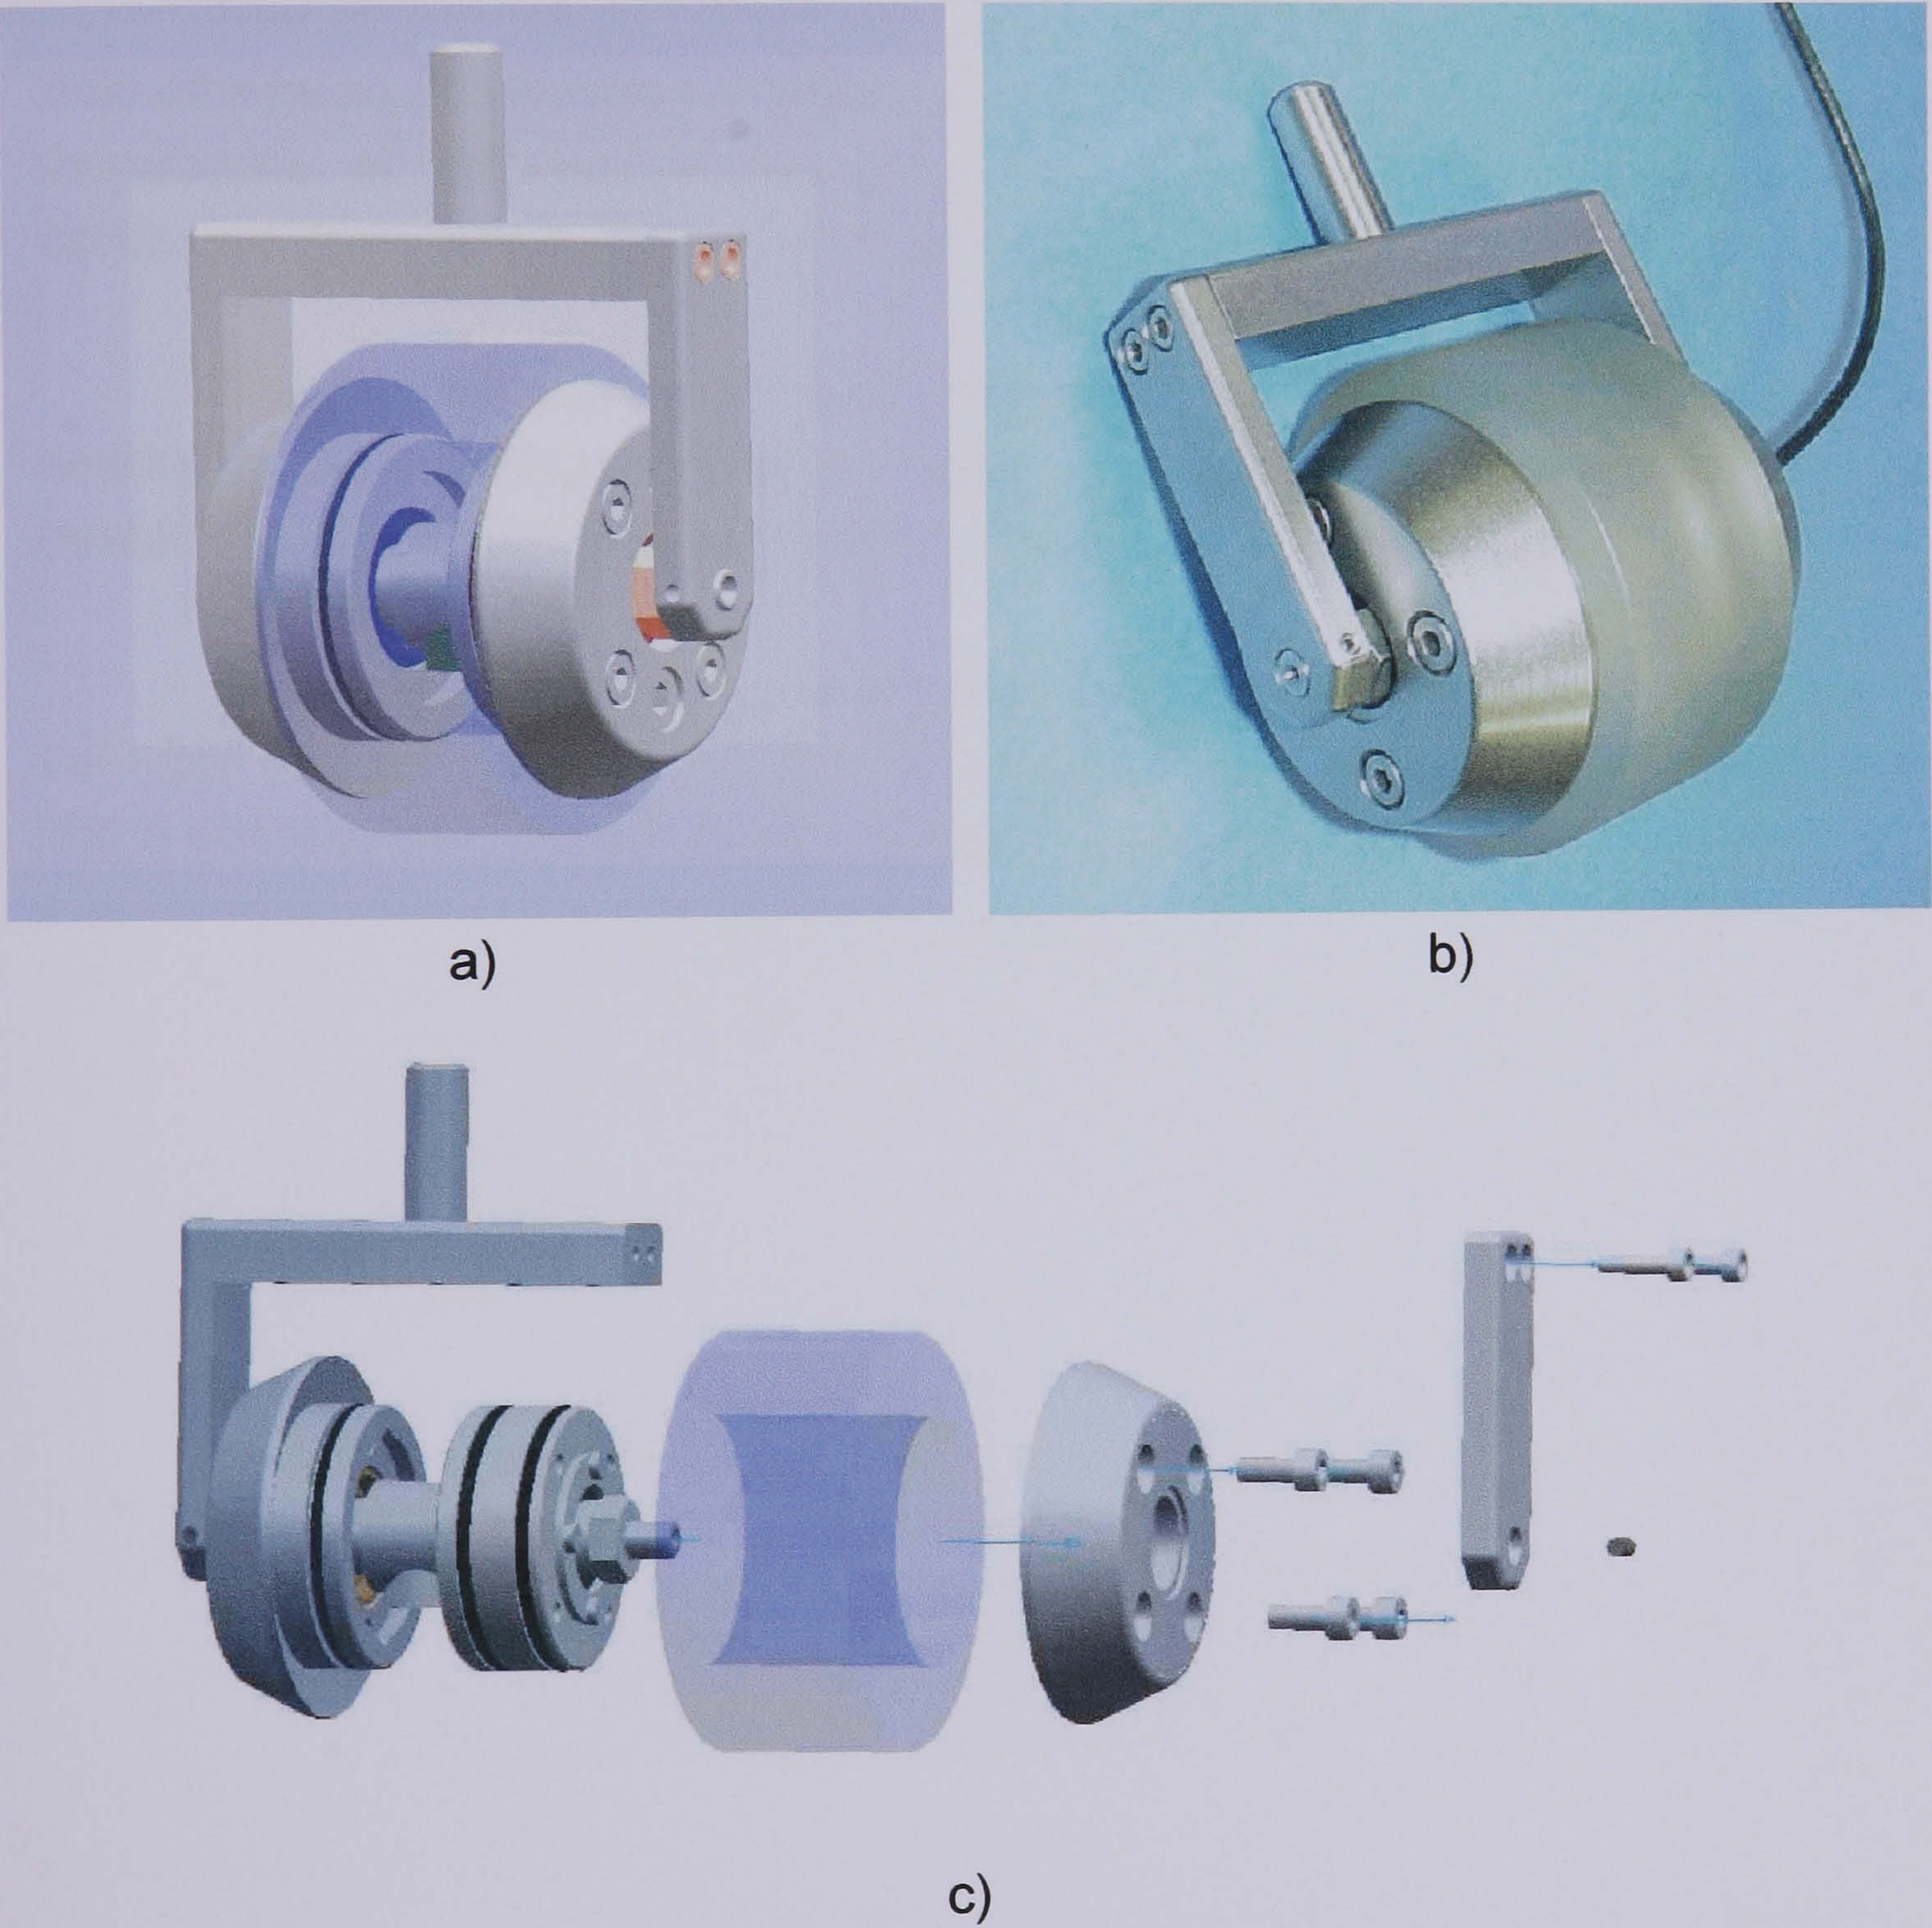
A) 3D model of commercialised wheel probe, generated in Solid Edge. B) First wheel probe manufactured commercially. C) Partly exploded view of wheel probe assembly.
